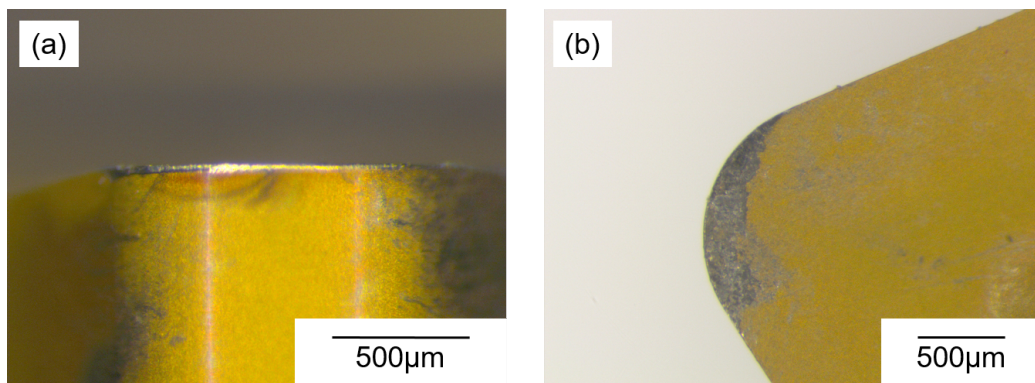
Example tool wear produced during face turning of face 1 of billet 4_1. The tool shown was used during the 3rd repeat of face 1. The tool shown is representative of all passes performed on face 1.
